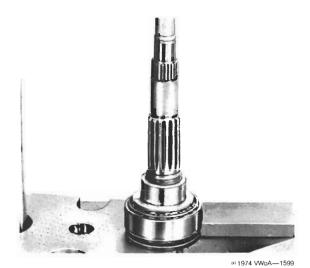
Drive pinion being pressed out of double tapered-roller bearing and other parts. Make sure that only the inner race of the bearing is supported.
